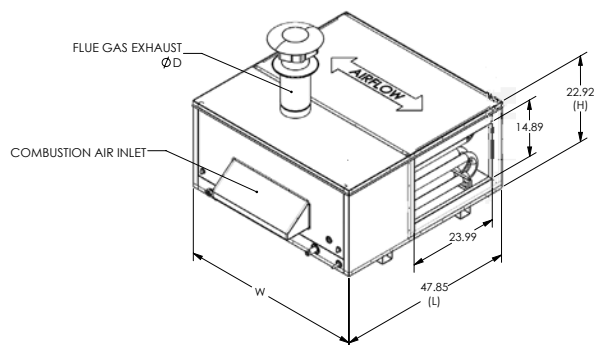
RT-WO (FRONT EXHAUST OUTDOOR)
